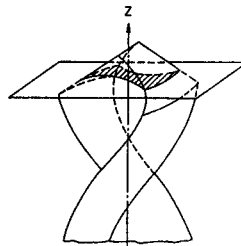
Diagram showing sectioned surface perpendicular to drill axis
